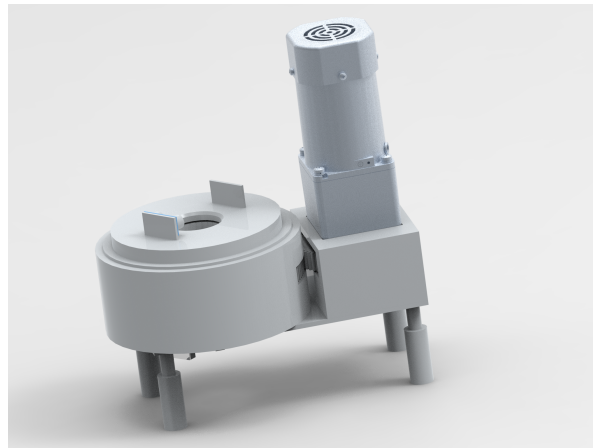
Preliminary Design Of Raptor With Clamping Blocks.
